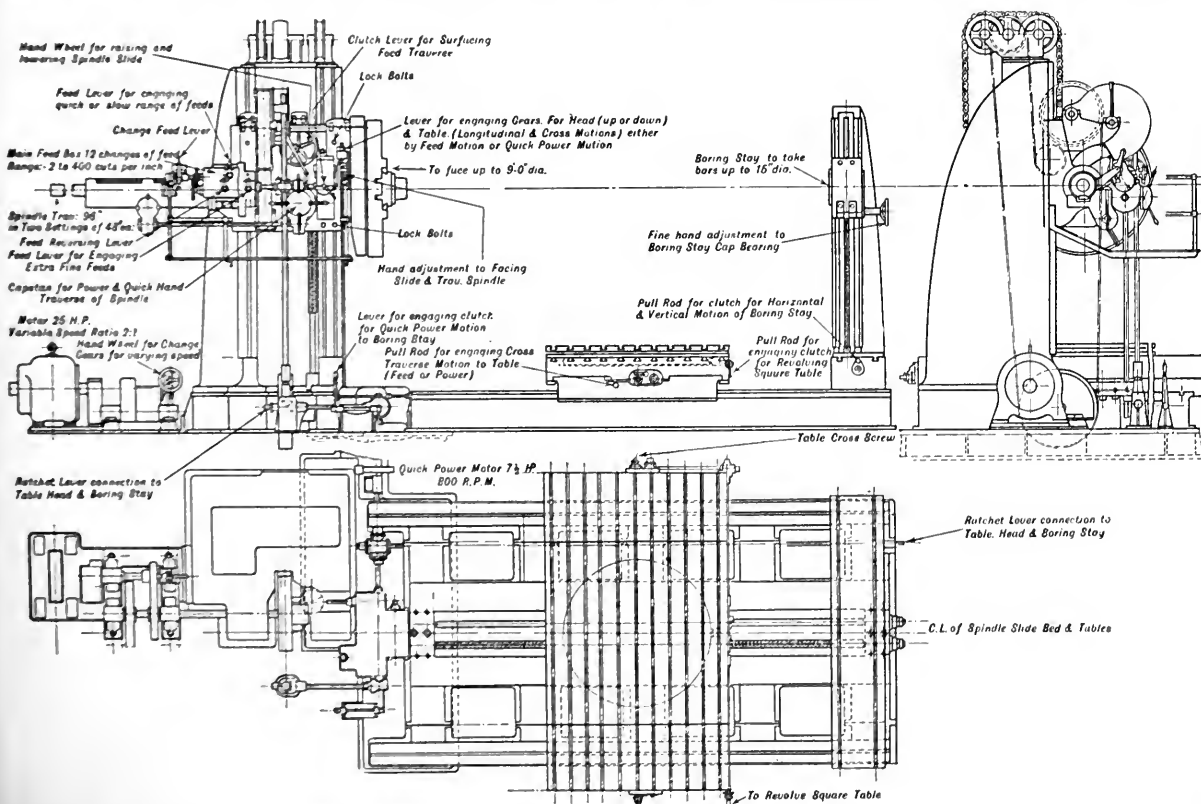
ELEVATION AND PLAN OF LARGE SURFACING AND BORING MACHINE
